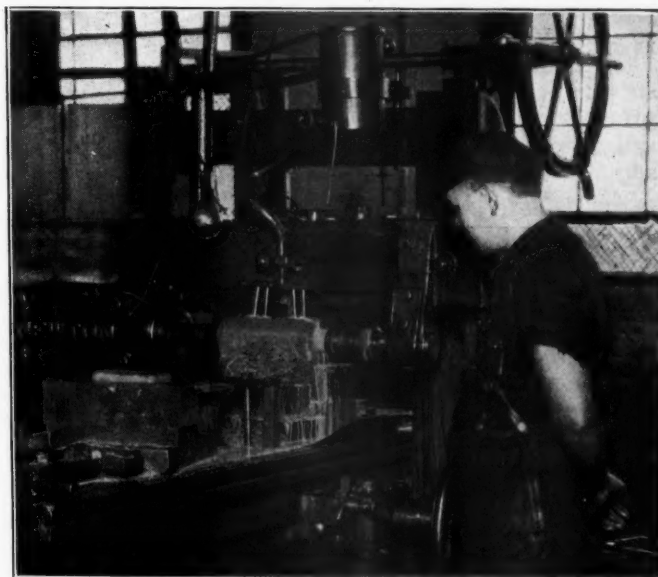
Milling a link bracket on a horizontal miller with the cutters completely covered with the lubricant
